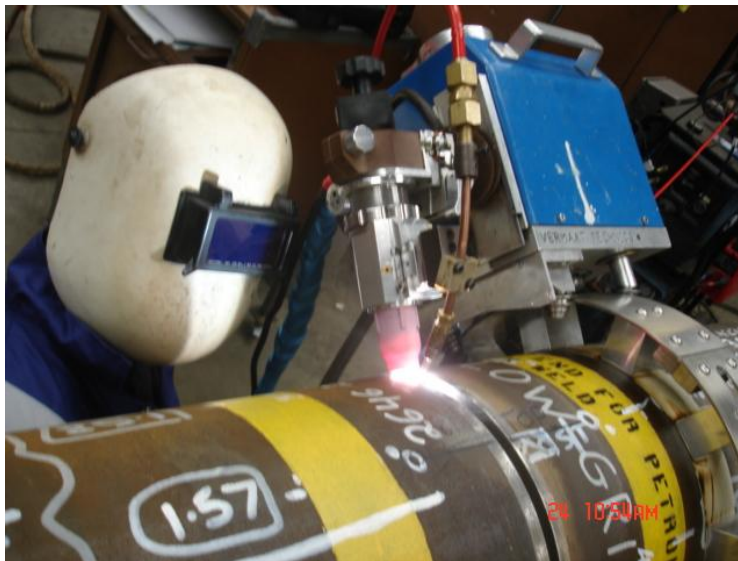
Typical pipe welding equipment in operation: Auto Hot wire PGTAW using Vermatt welding system
